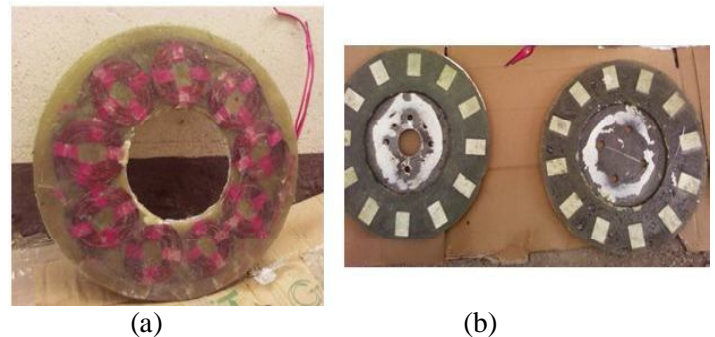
(a) Stator mould; (b) Rotor disks with PMs
